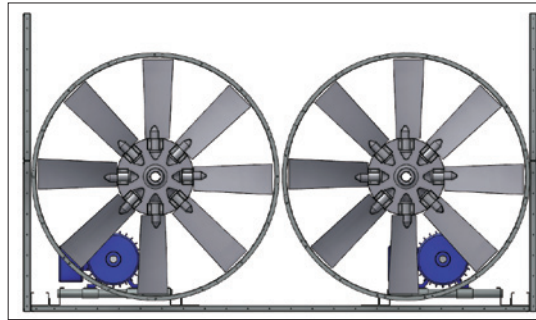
S15E/XES15E-1212-x Independent Drive Motor Location
